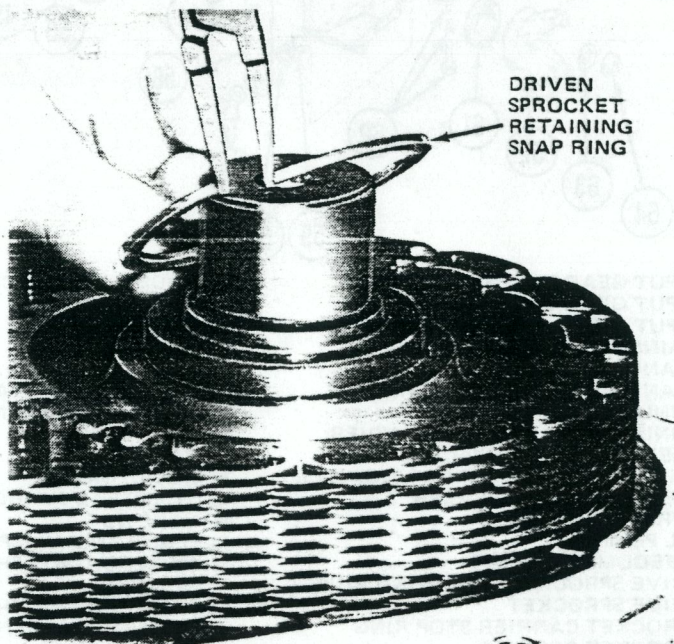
D-13 Driven Sprocket Retaining Snap Ring Removal/Installation
